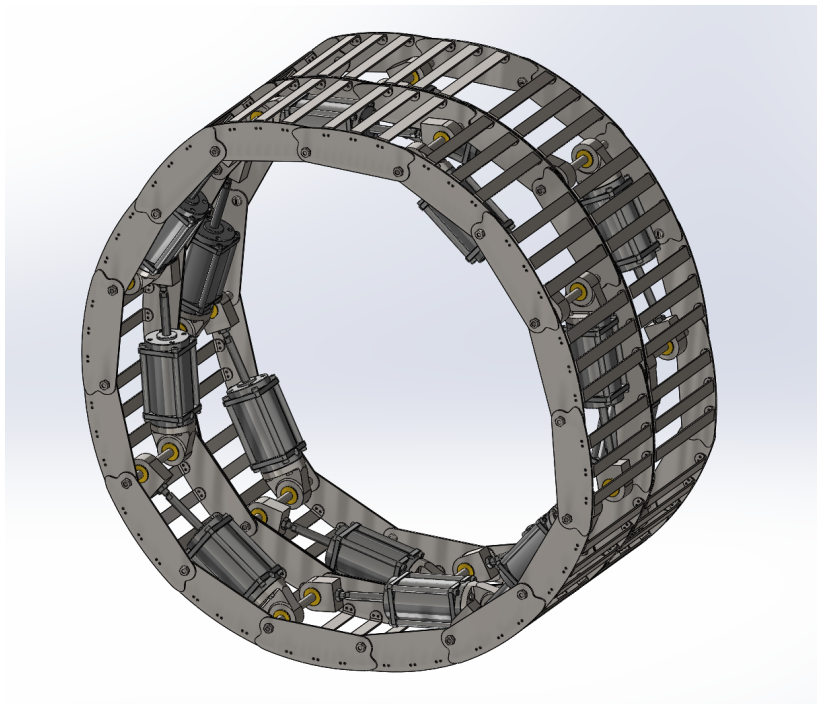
Detailed view of the assembly, showing spacers, and bearings.
